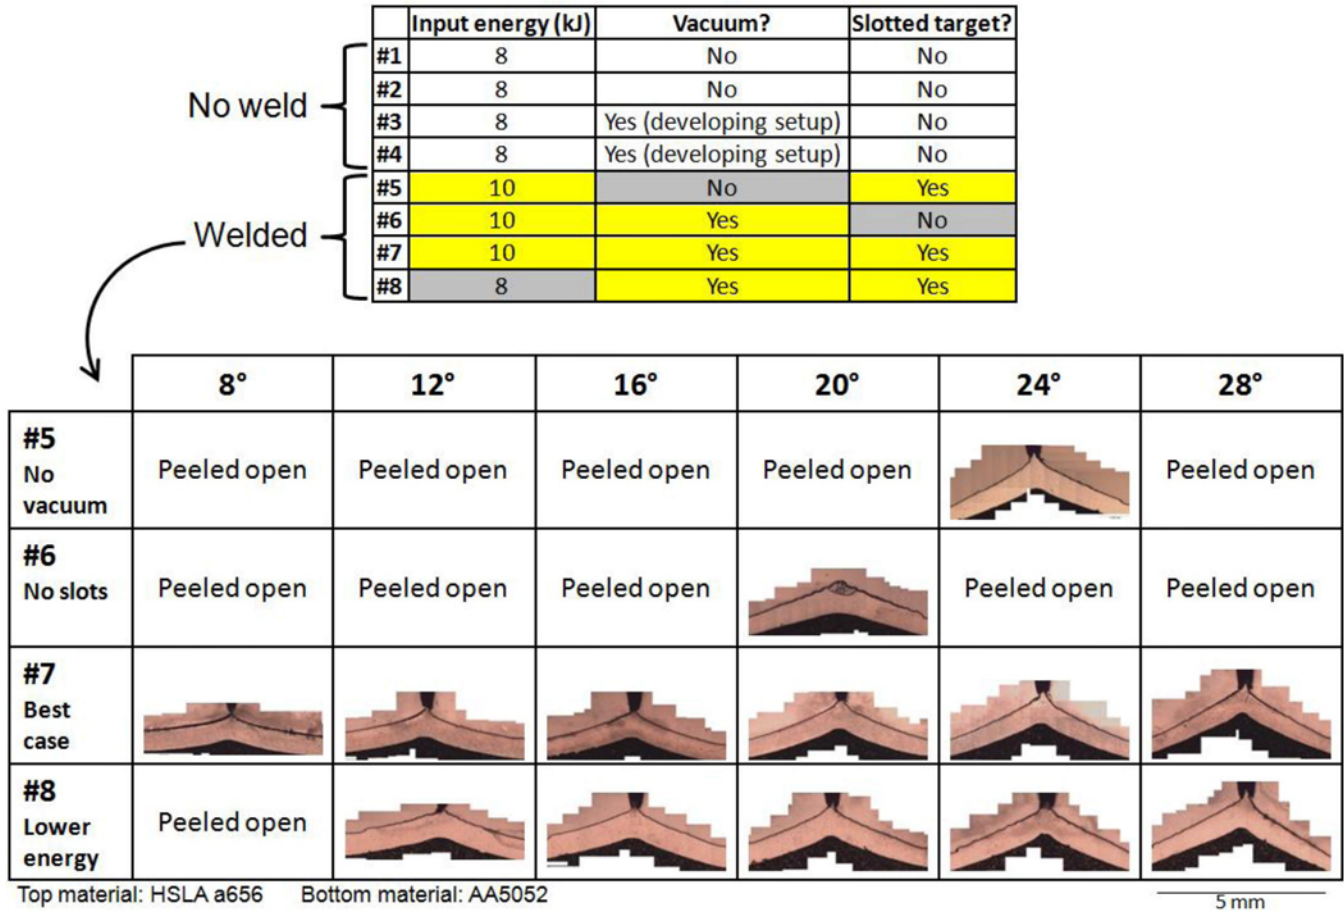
Welding window of HSLA steel A656/AA5052
